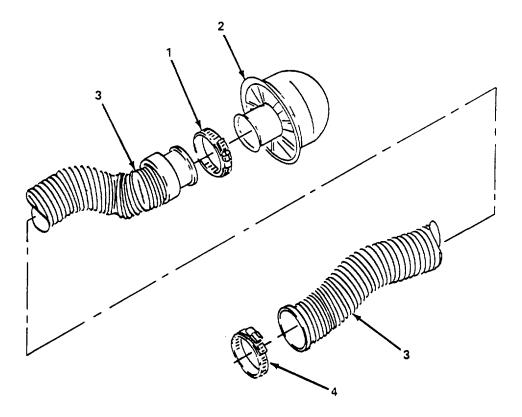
Pre-Filter and Hose Assembly, Repair.
